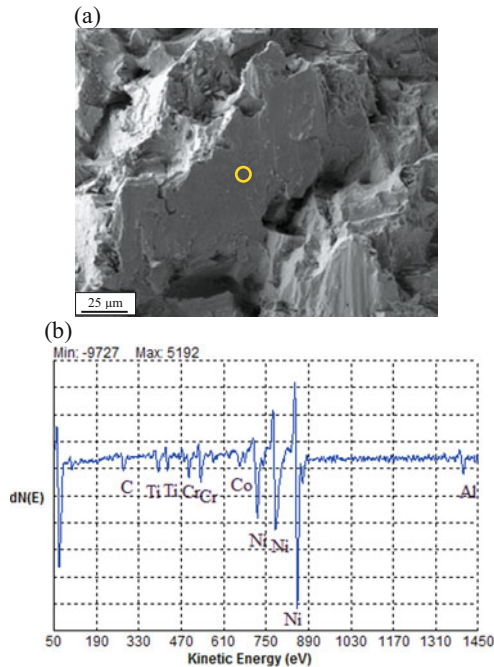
Fractured Auger pin from top filled air cast blade. (a) Cleavage plane; (b) Corresponding AES spectrum
